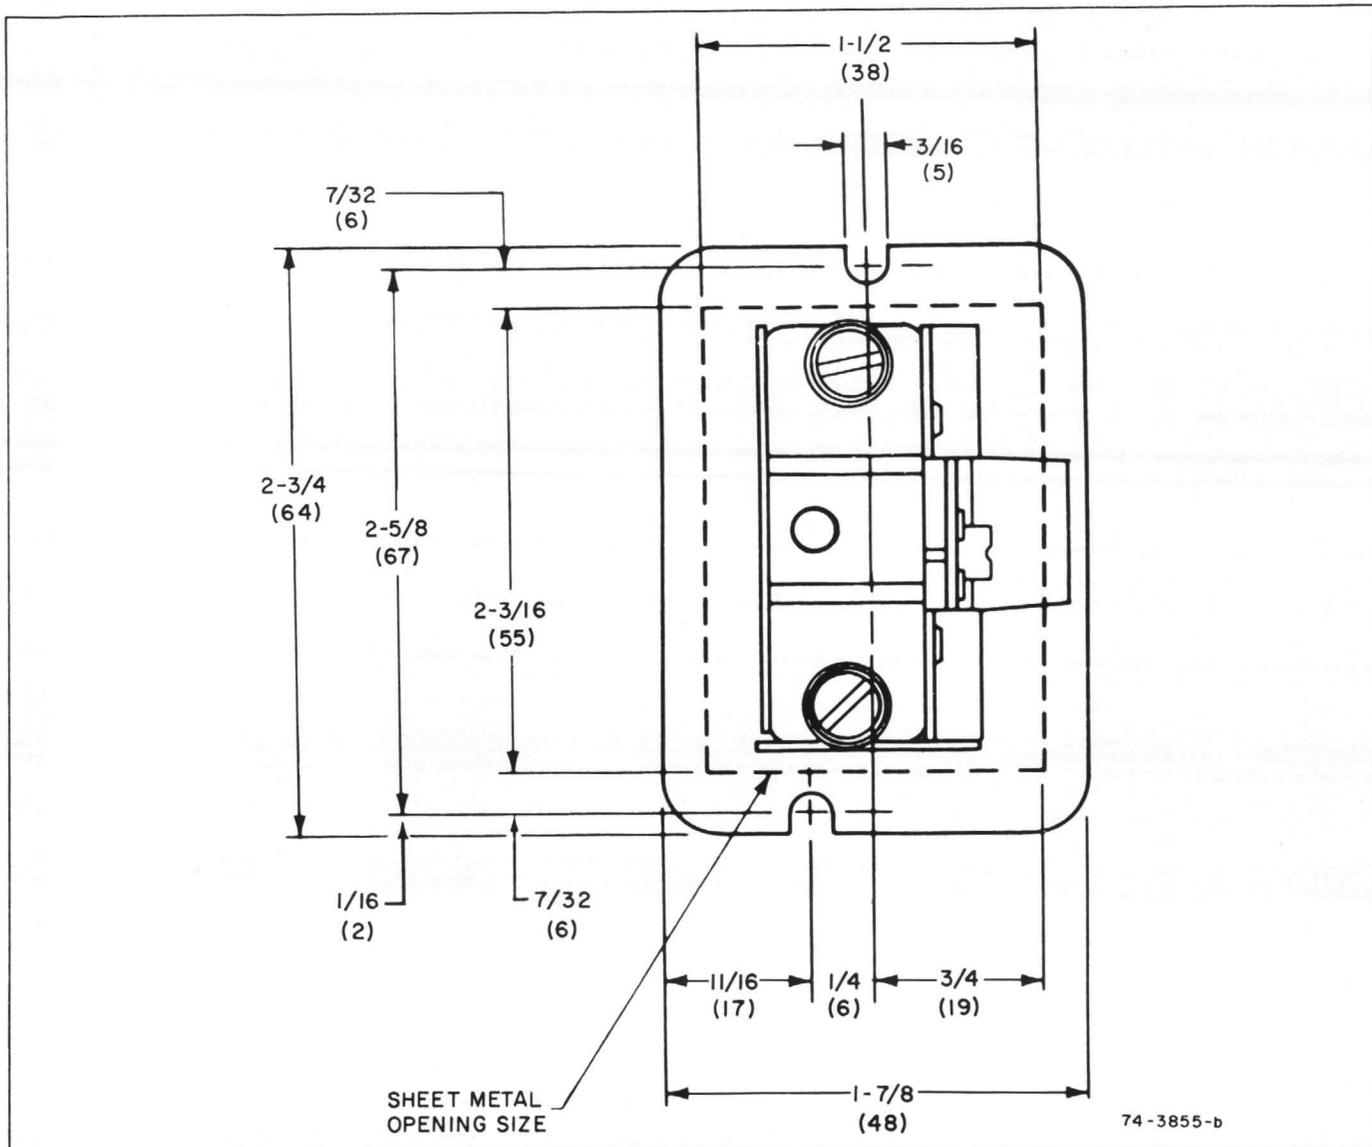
L4029F DIMENSIONS IN INCHES (MILLIMETERS)
